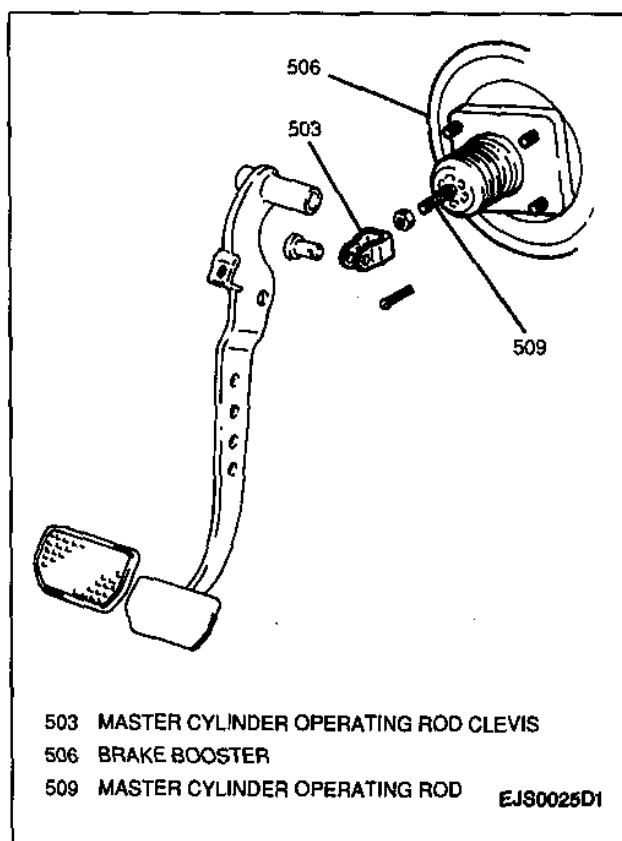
Brake Pedal-to-Master Cylinder Operating Rod Clevis
